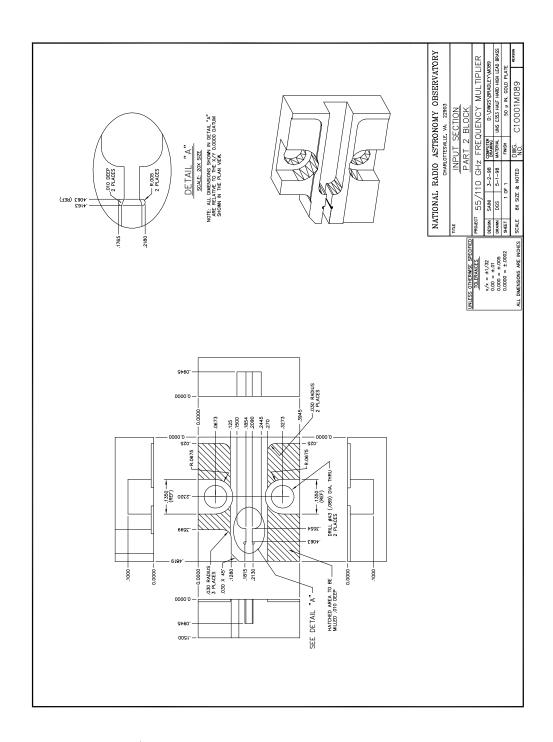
55/110 GHz frequency doubler: Mechanical details of the input section insert of part 2 of the two piece split block.
